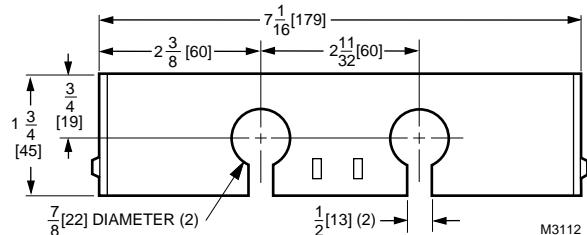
Top view of Q520A1121 Wiring Subbase (4-sided) with dimensions in inches [millimeters].
